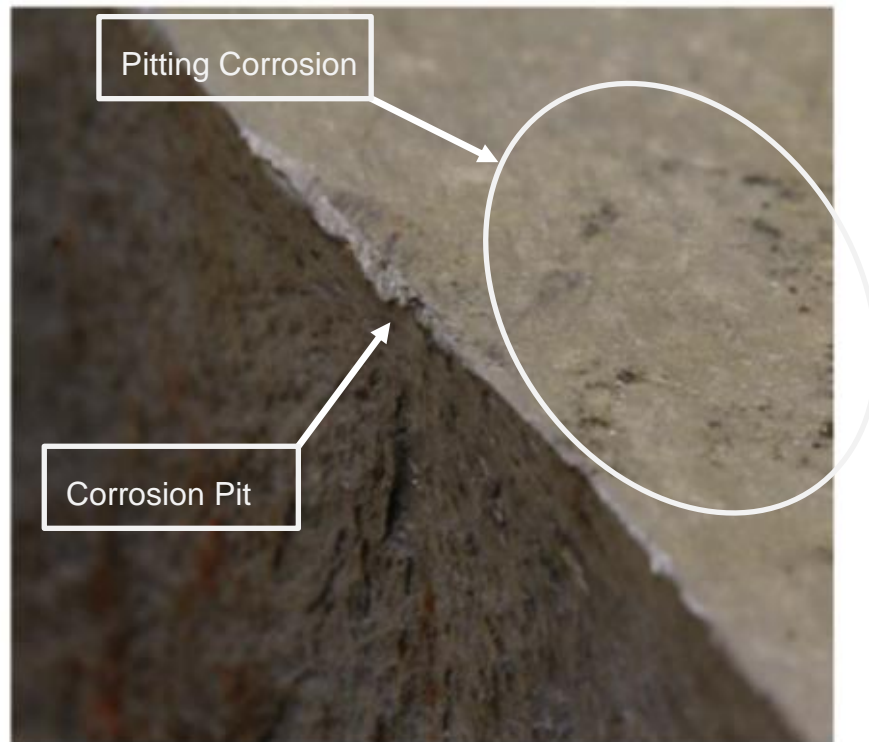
Photograph of Cessna T210M Fractured Carry -Through Spar INBD Fracture Surface.
